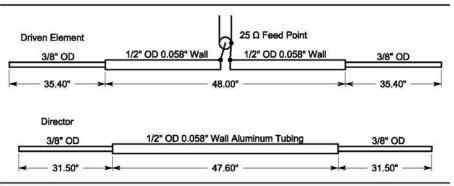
T6 aluminum element dimensions for the 6-meter beam.
